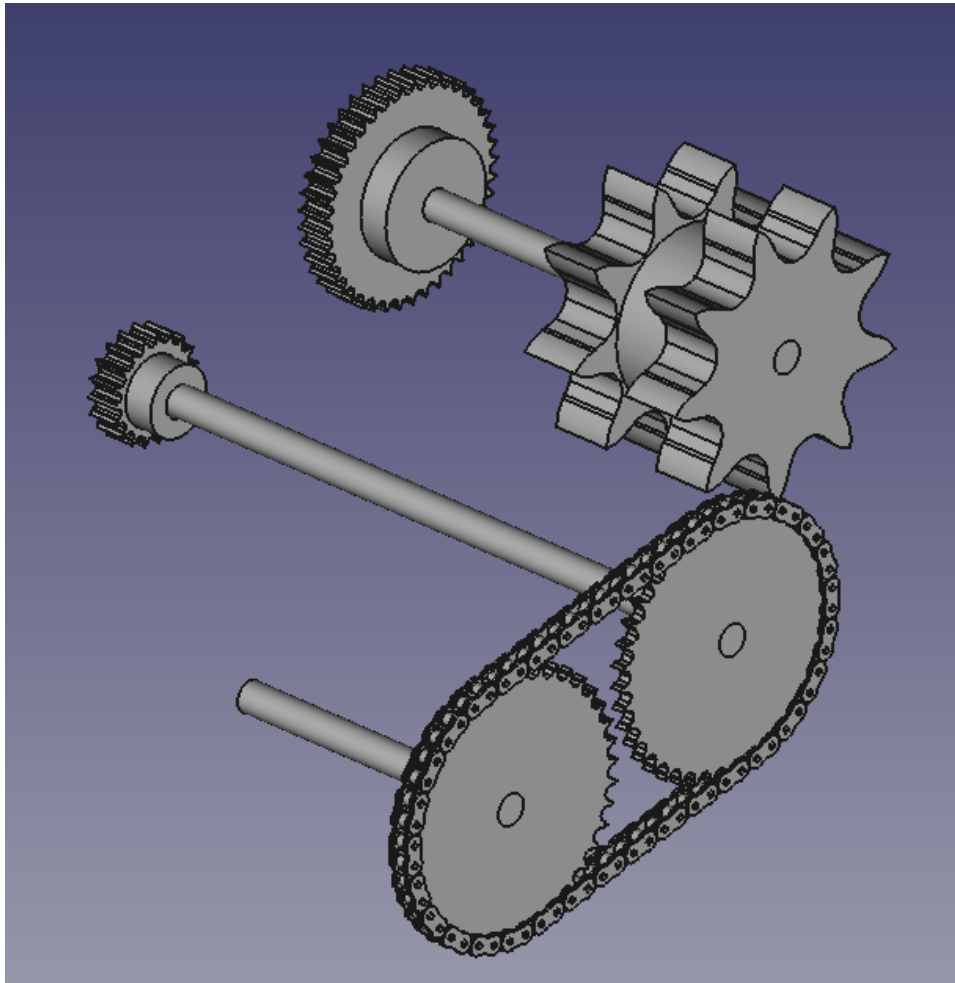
Suggested transmission from motor axle to variator axle. Designed in FreeCad.
